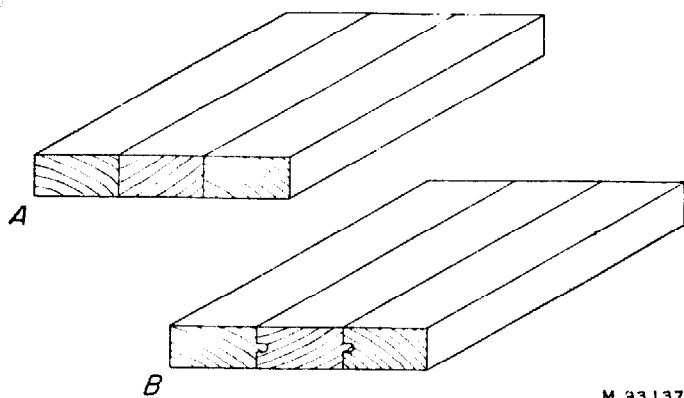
Side-to-side-grain joints: A, plain; B, tongued-and-grooved.
